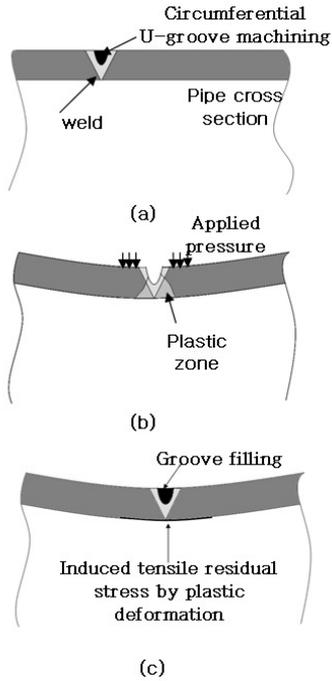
Suggested new method process for mitigating tensile residual stresses induced on the inside wall of dissimilar metal butt welded pipes.
